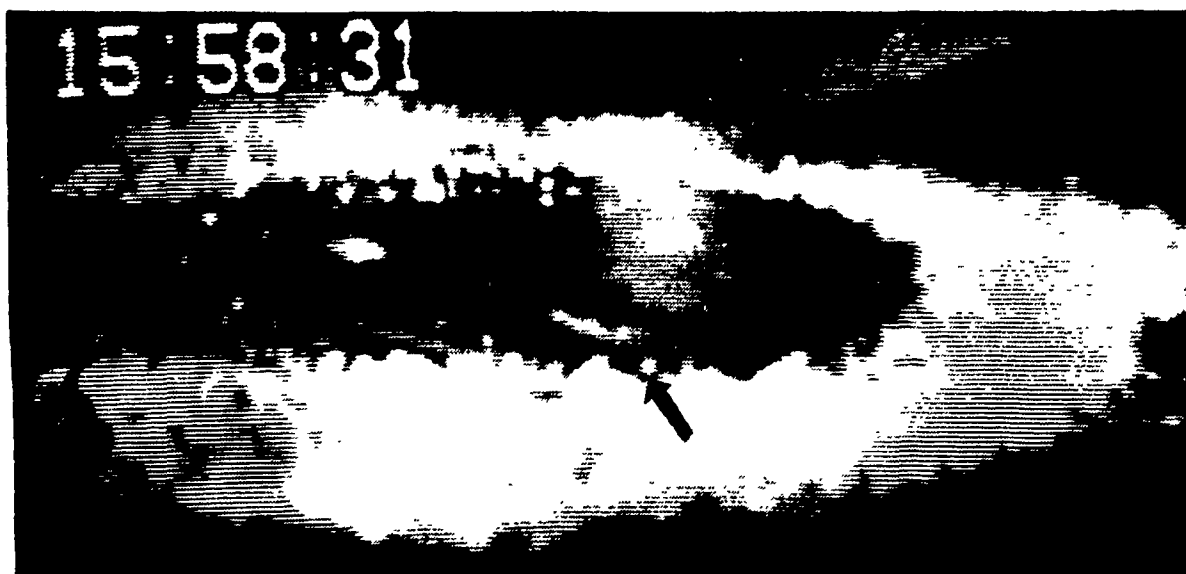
Weld Pool Flow. Time + 0 Seconds, 250 A, 14,2 v, Welding Speed 2.27 mm/sec. Enlargement x5.5.
